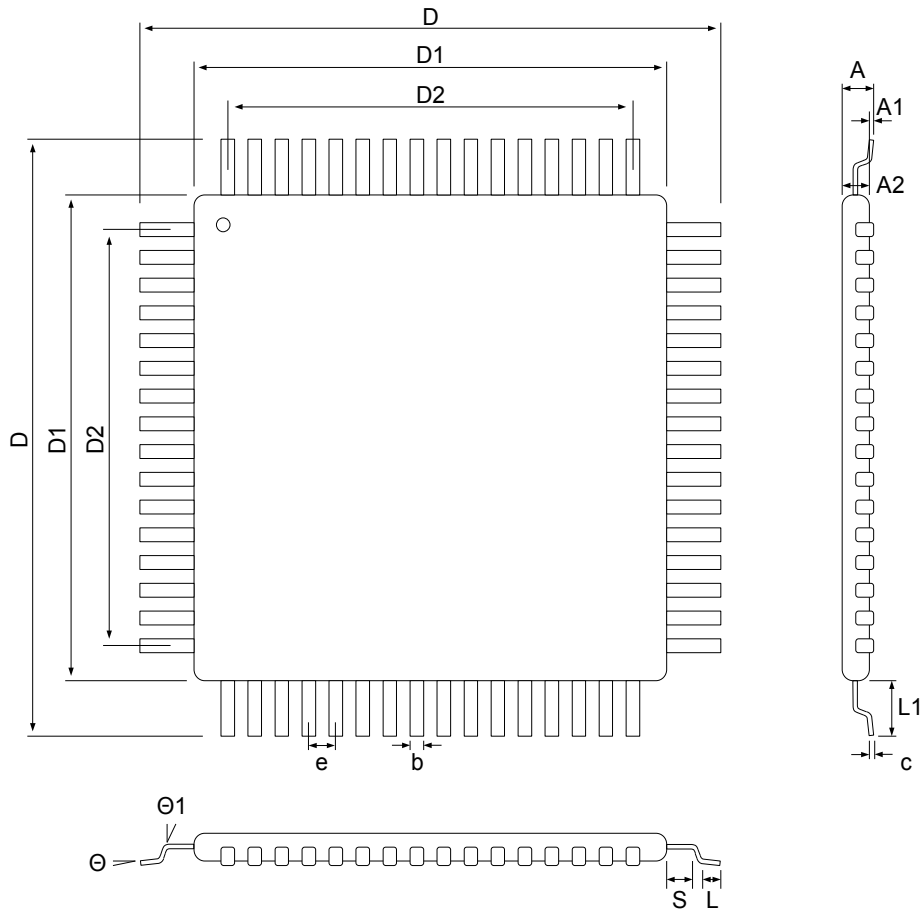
TQFP 64 Package dimensions (millimeter unless otherwise noted)
